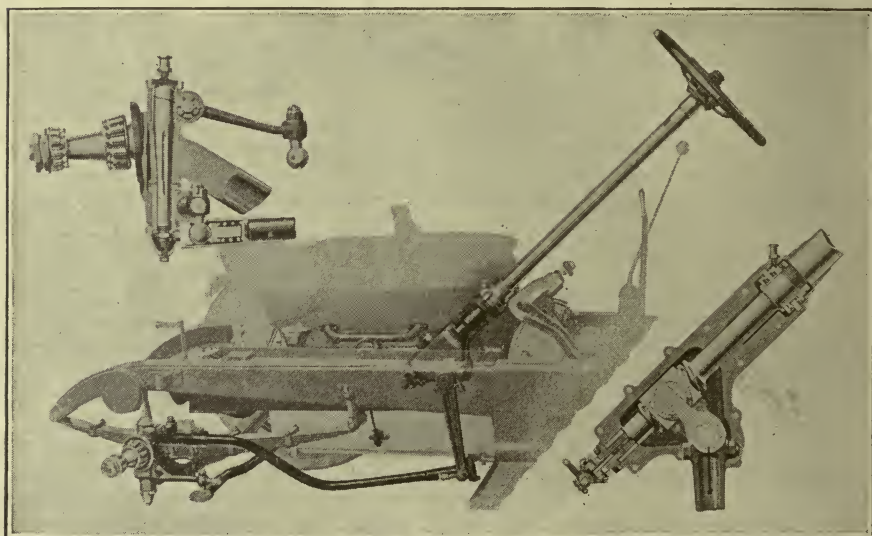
Packard Twin Six Steering Gear, Linkage and Front Axle.
